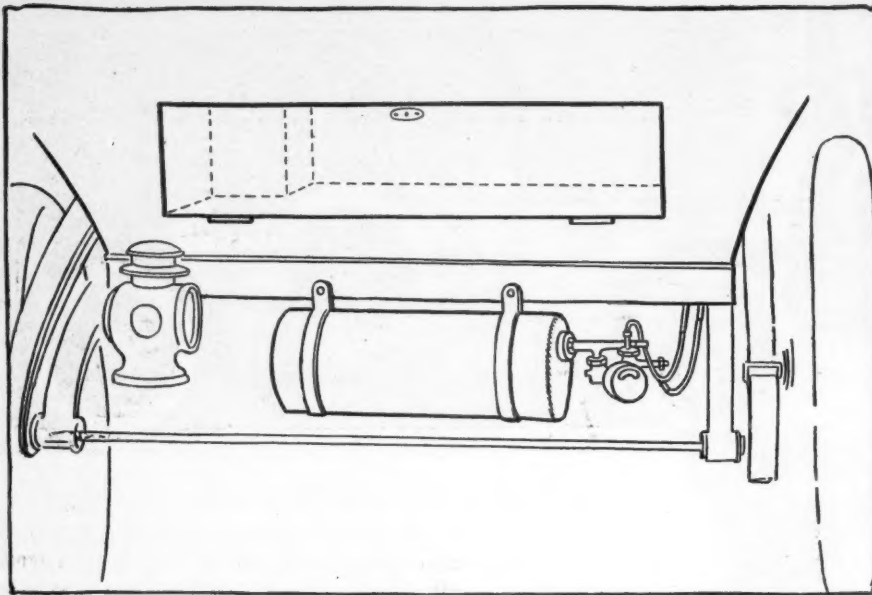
RAMBLER PREST-O-LITE CARRIER
